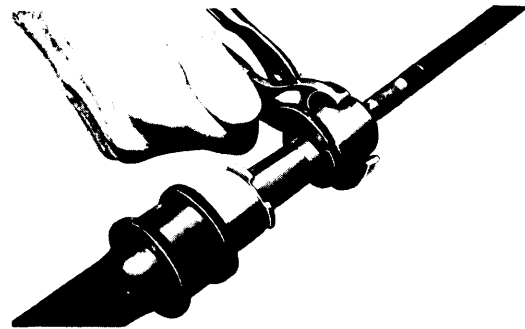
Procedure for Removing Outer Bearing Cap Lock Nut
